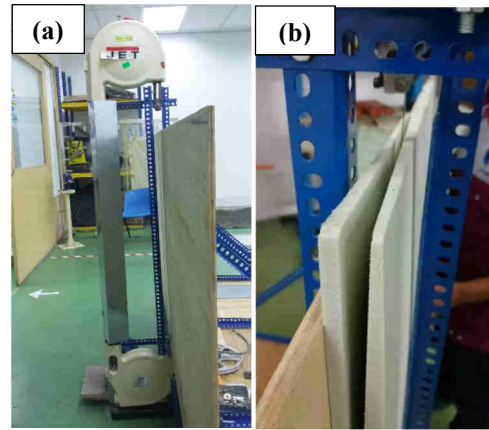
Completed cutting technology (a) side view, (b) close-up view
